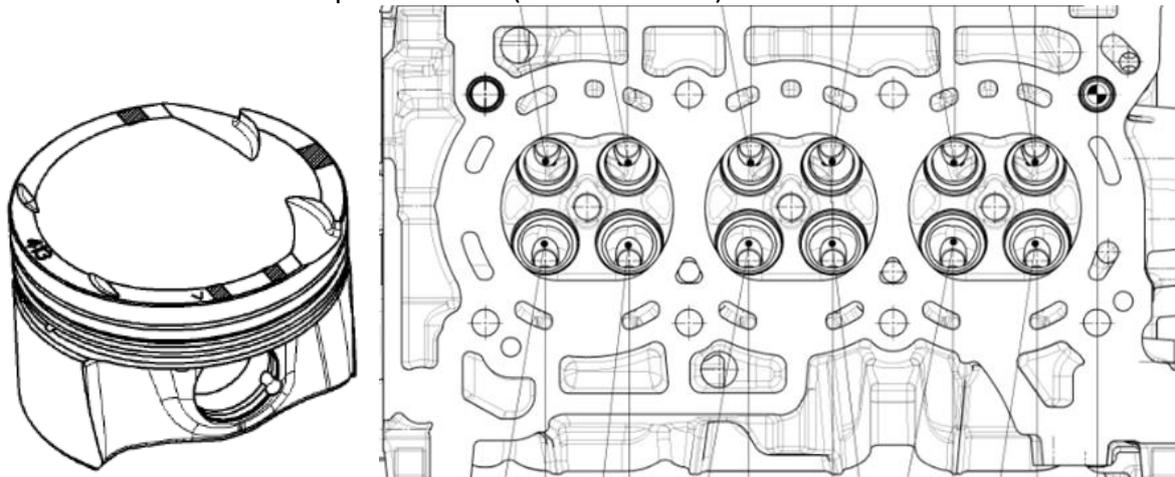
Real engine piston and cylinder head geometry ^[11]
